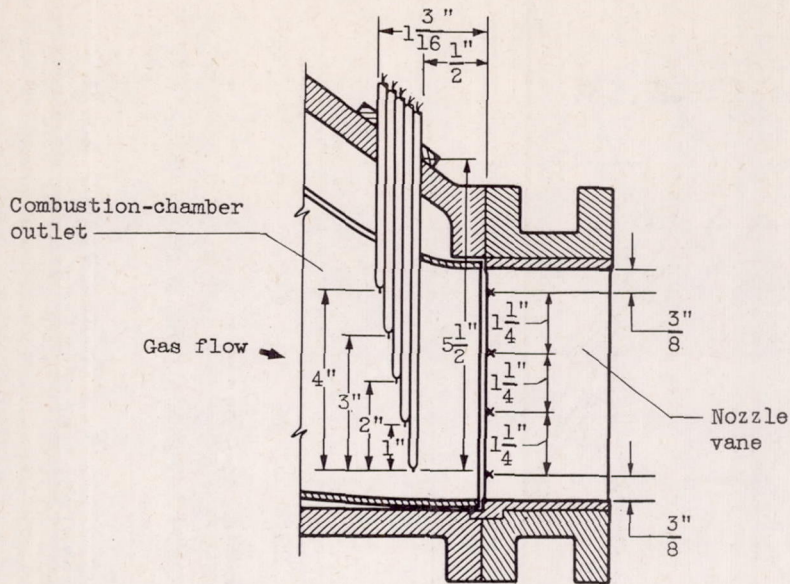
Thermocouples installed in combustion-chamber outlets of turbojet engine.
